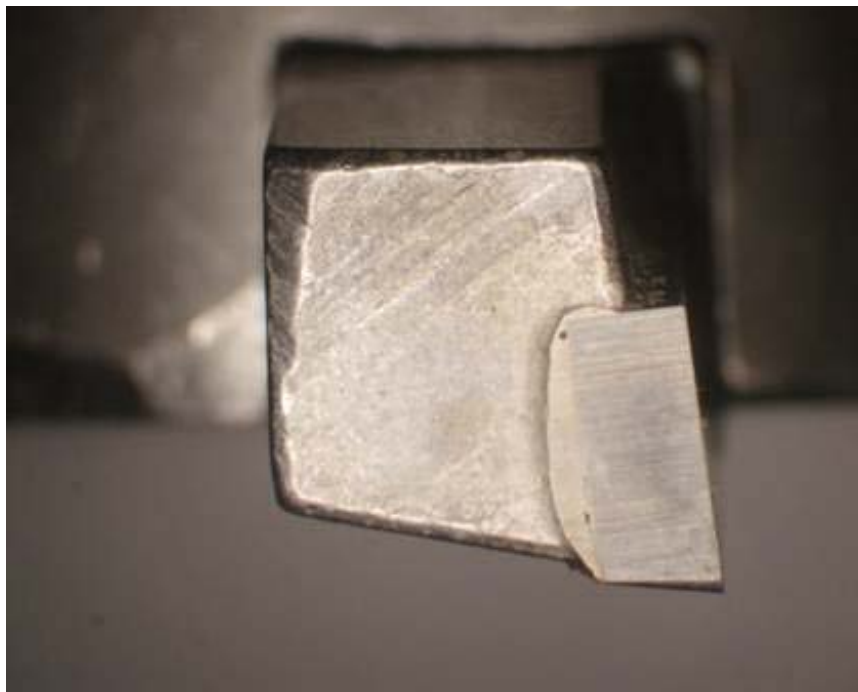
Image of Flycutter showing cutter rake and backangle.
